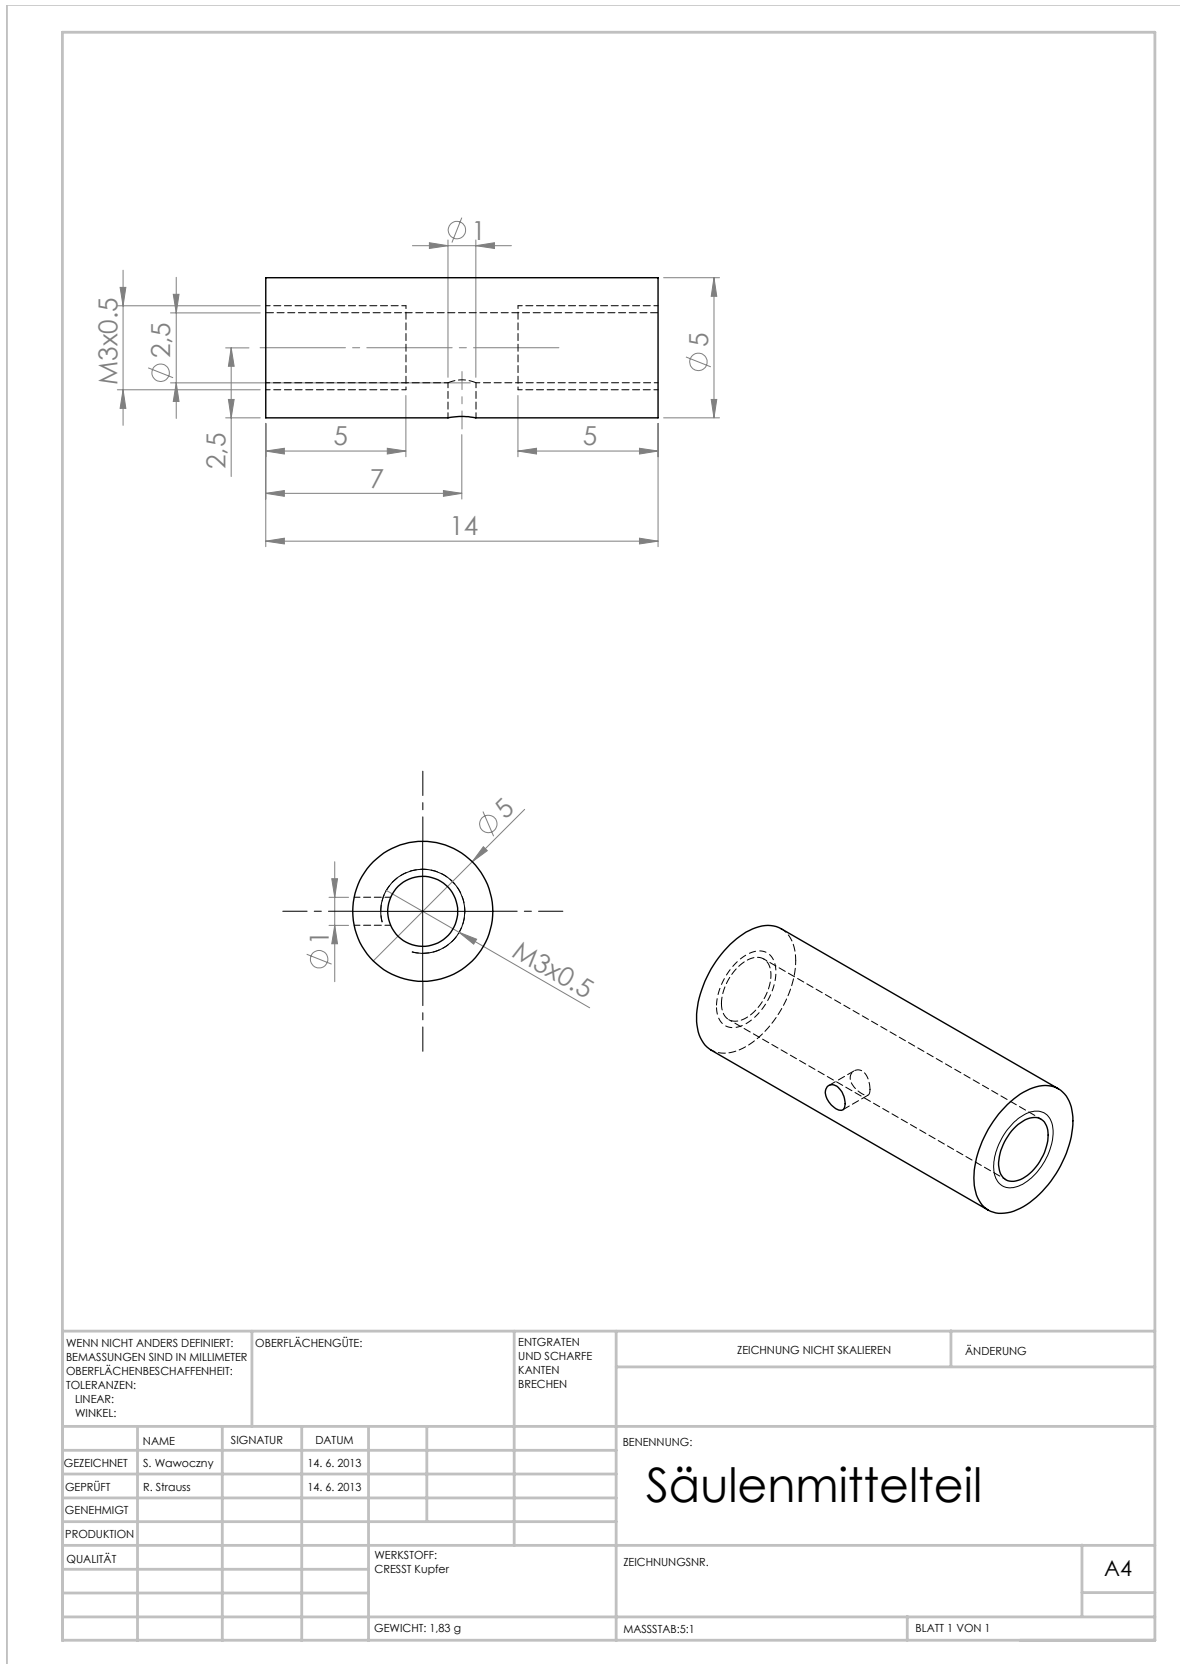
Technical drawing of the post connecting the copper rings according to figure B.1.
